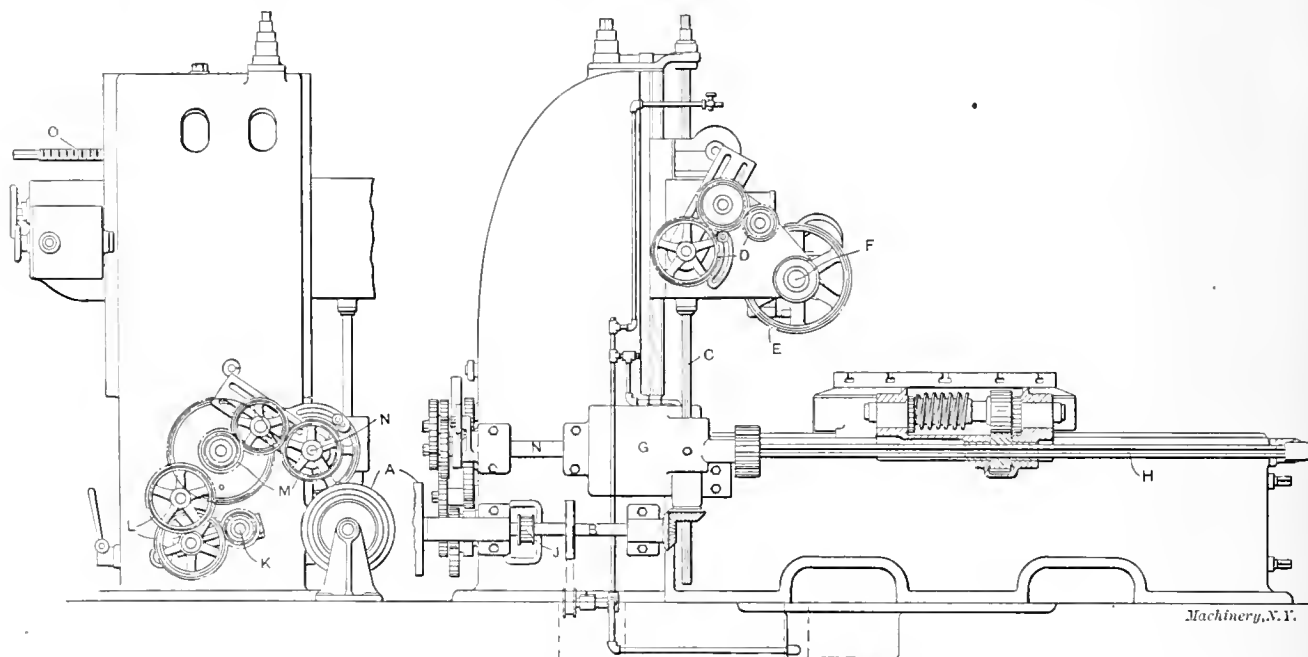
Diagram of the Driving Connections of the Atlas Gear-cutting Machine shown in Fig. 120.
